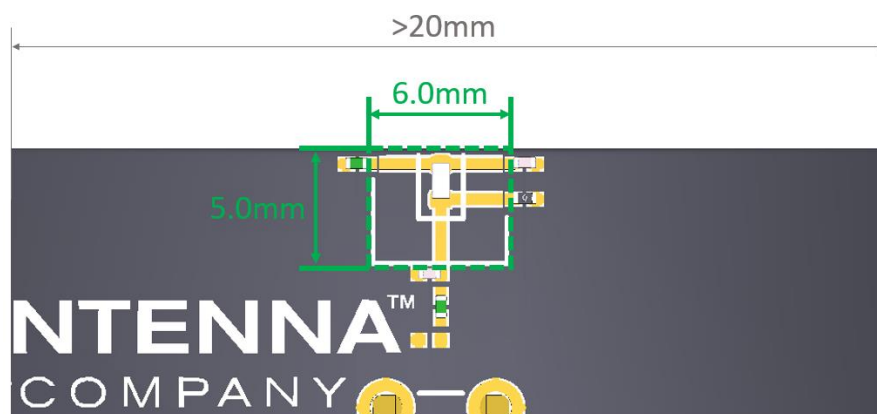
Illustration of the AC10248-01 integration on the top surface of the host PCB
